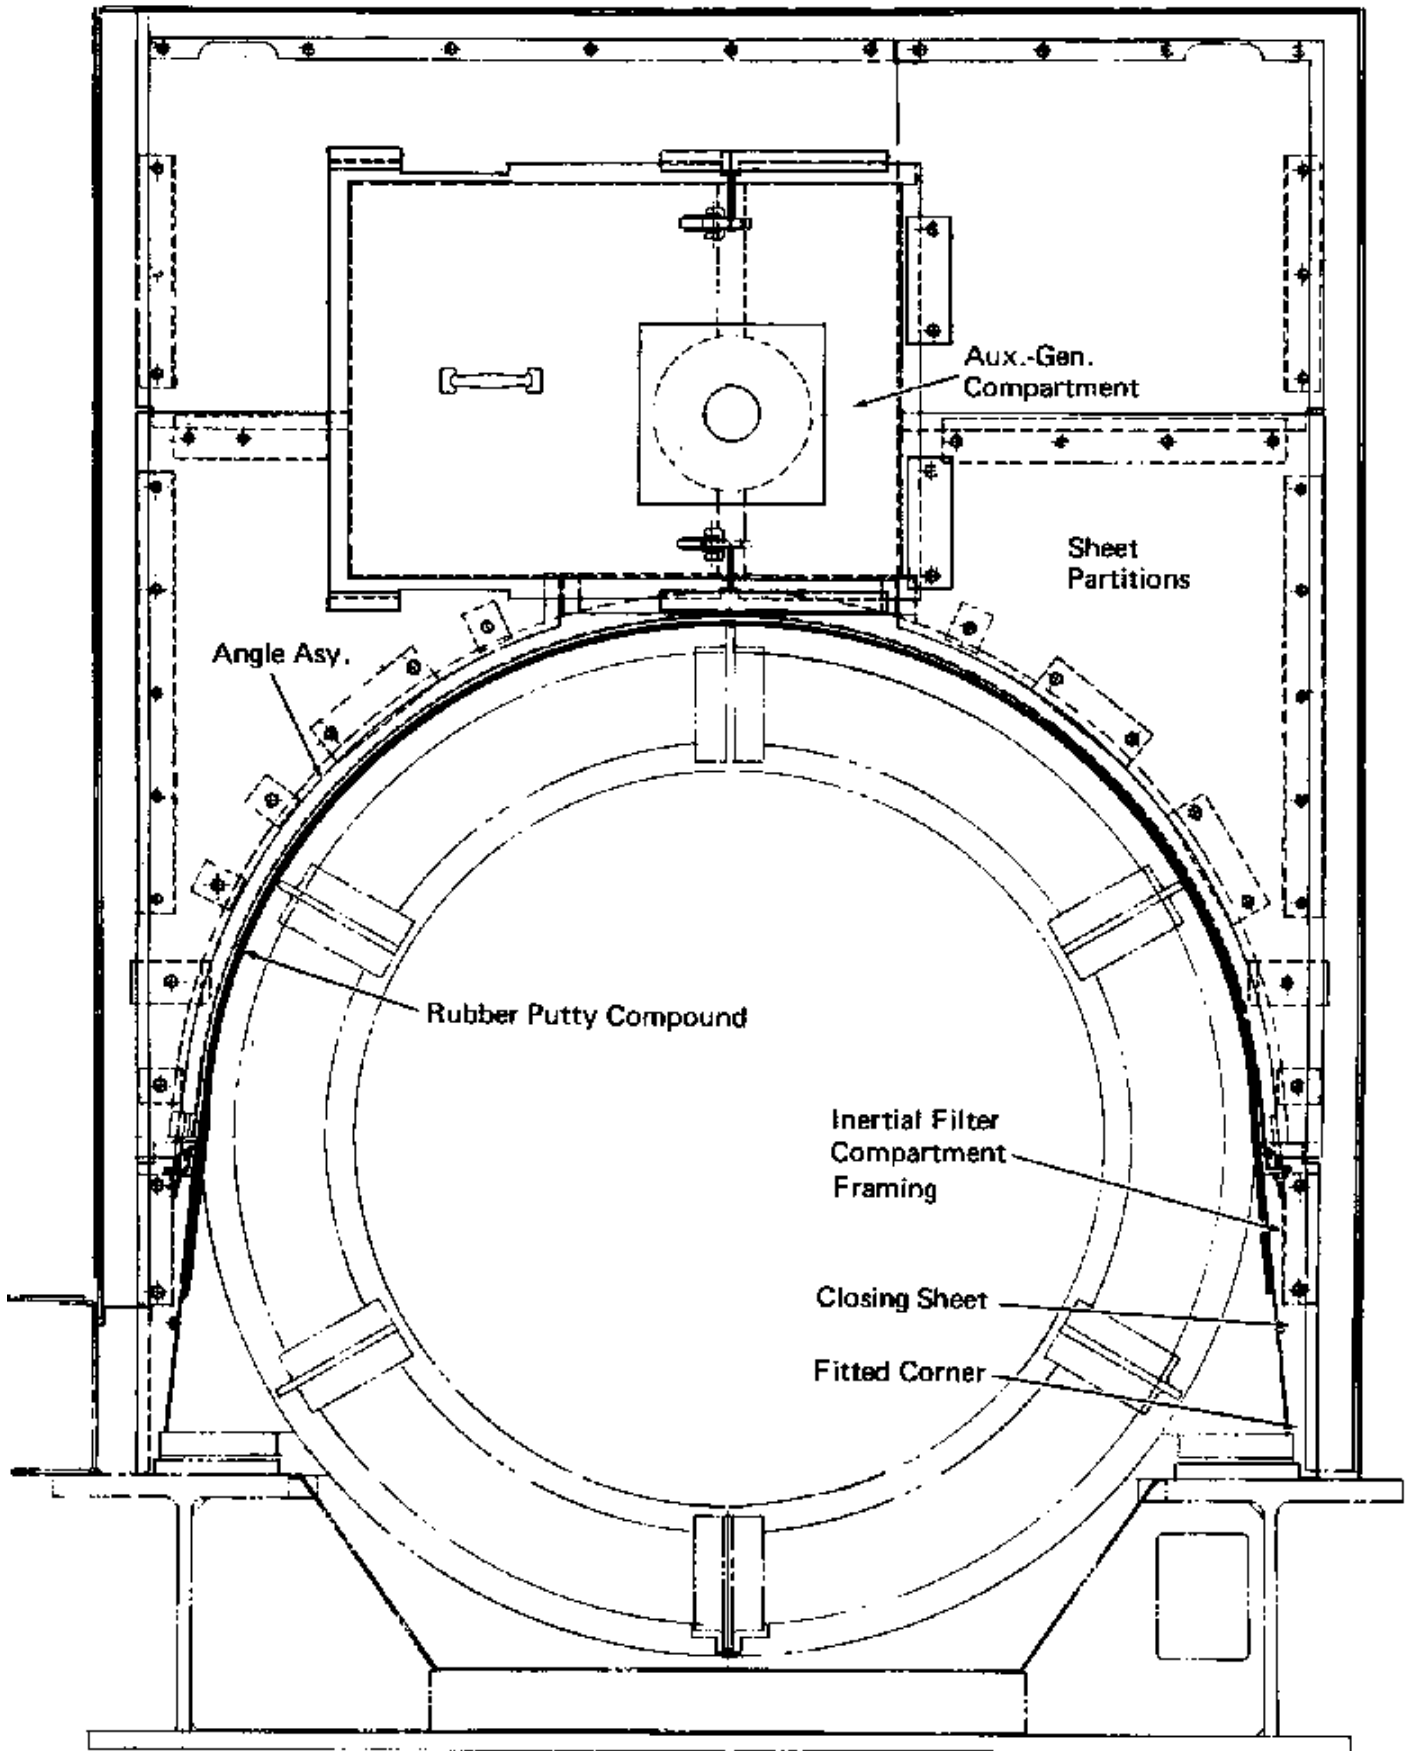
Engineroom Partition (Blower-Type Engine)
